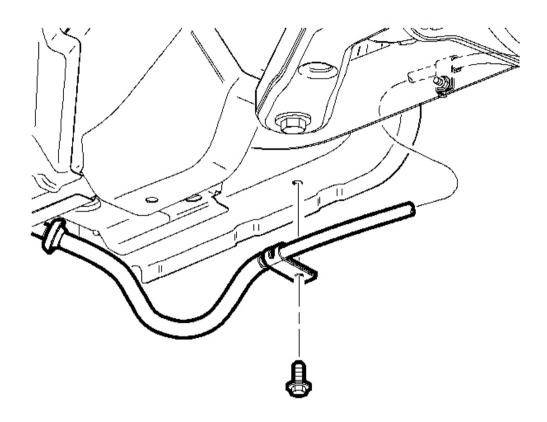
Removing/Installing Bolt From Park Brake Cable Retainer & Vehicle Underbody Courtesy of GENERAL MOTORS CORP.
